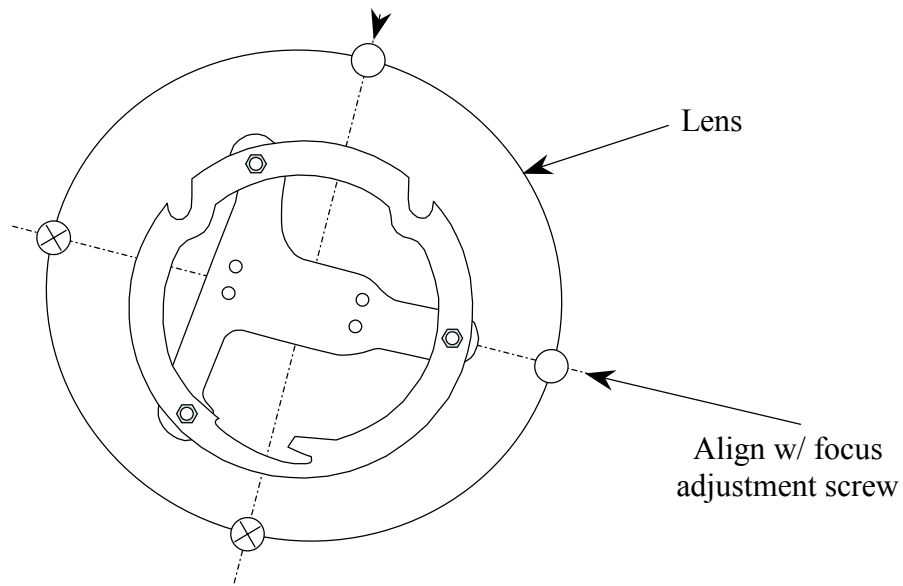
Alignment of Sighting Mark and Focus Adjustment Screw—250mm Lantern.
